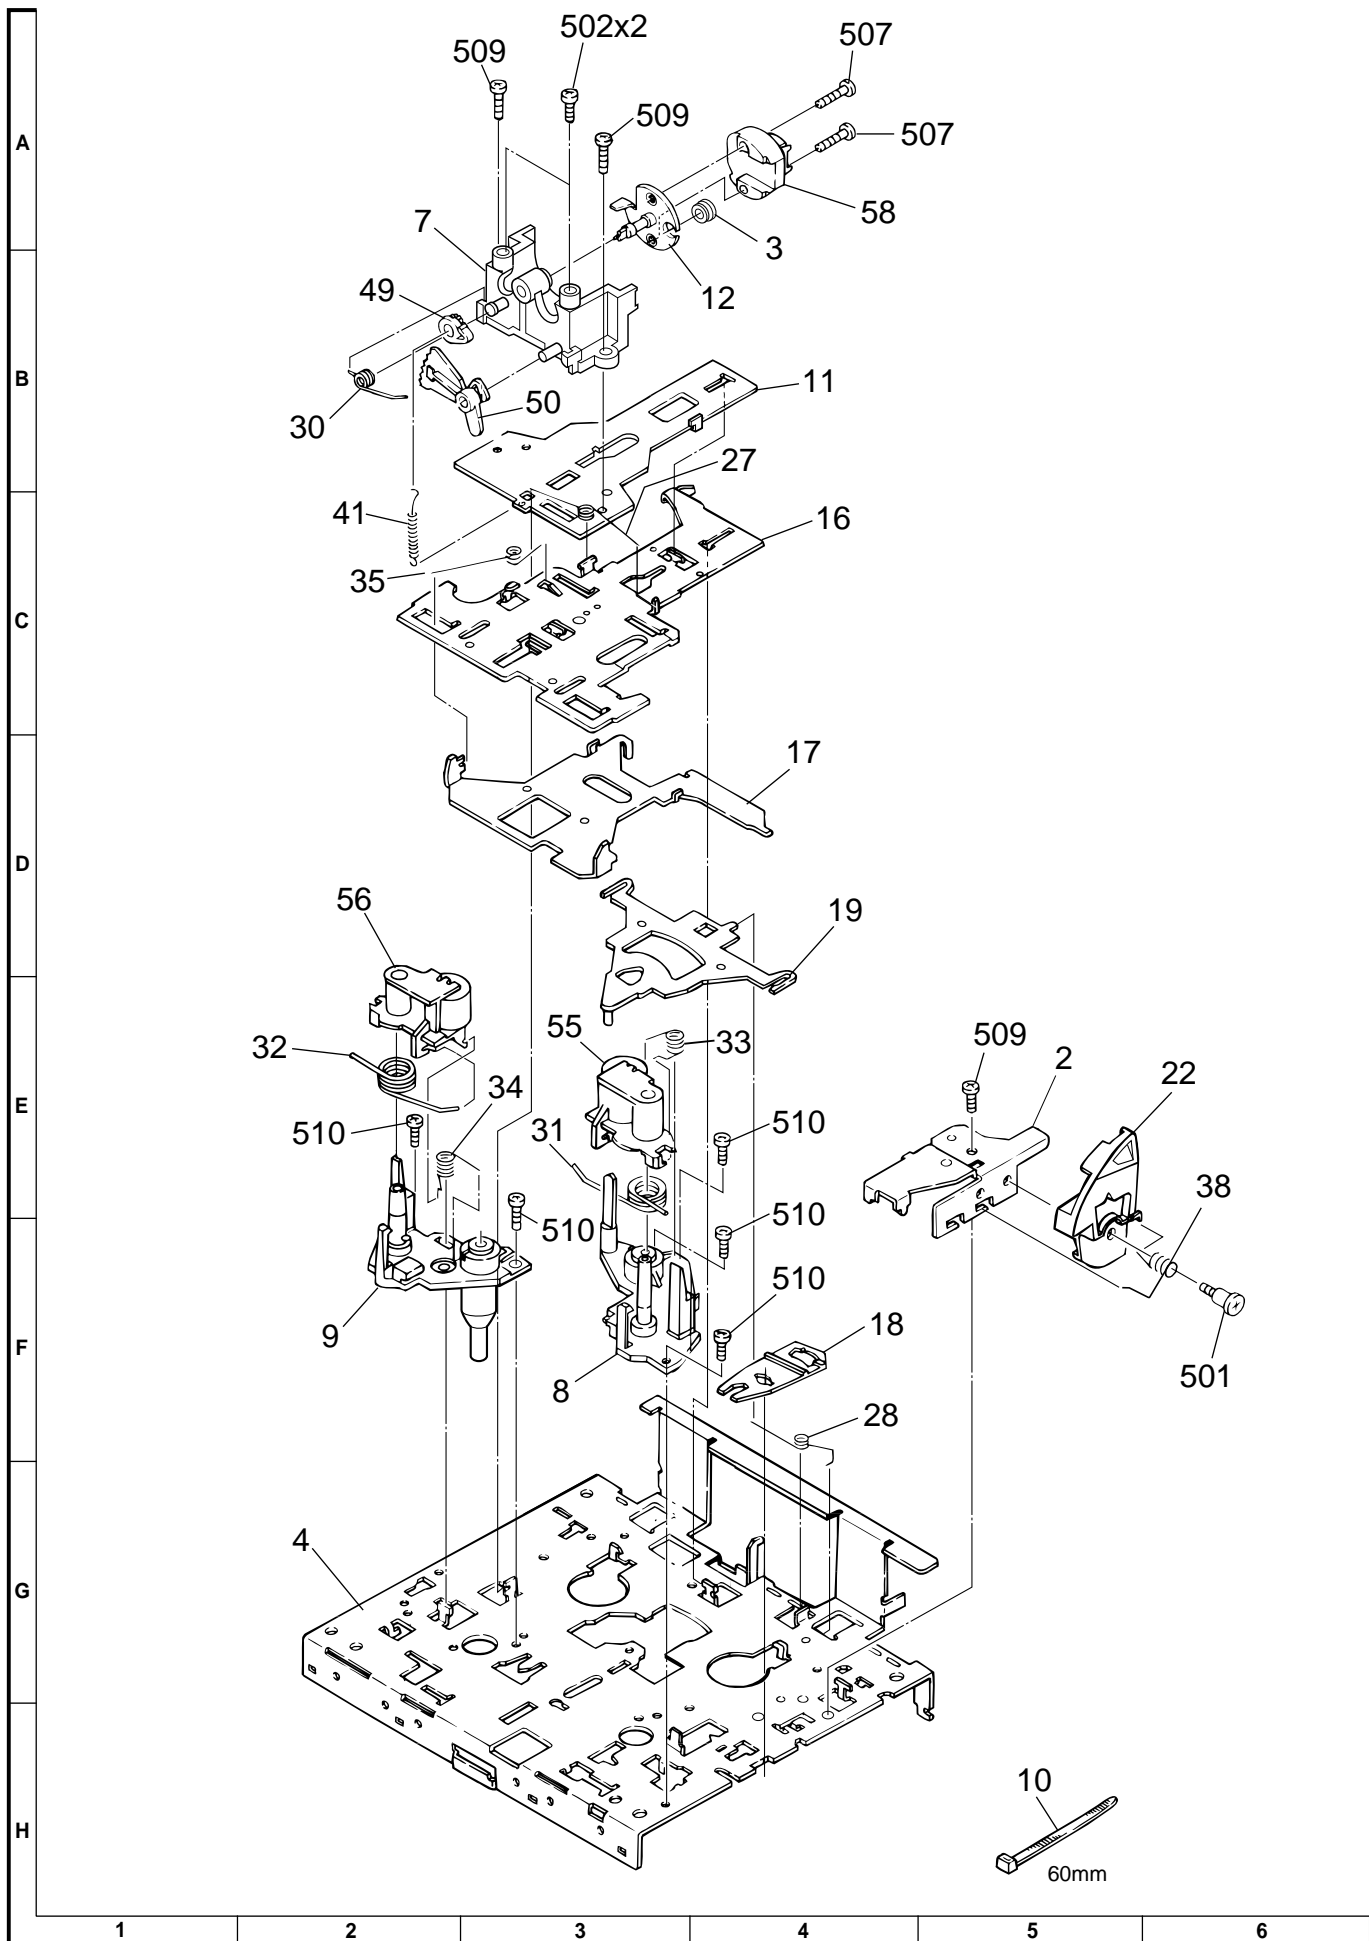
MECHANISM EXPLODE VIEW (1/2)
